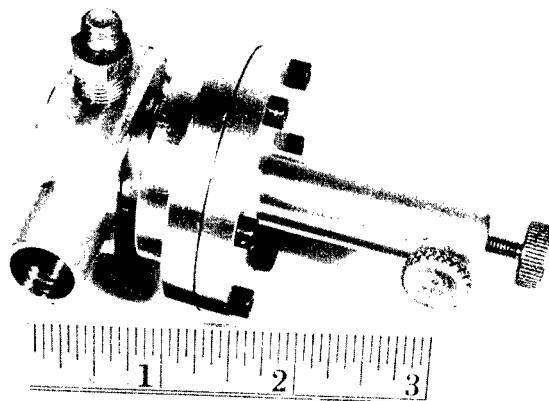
Assembled View of Redesigned Propane Carburetor Showing the 1.5 in. Diaphragm, Fuel Inlet (pipe fitting), Air Inlet and Spring Adjustment
